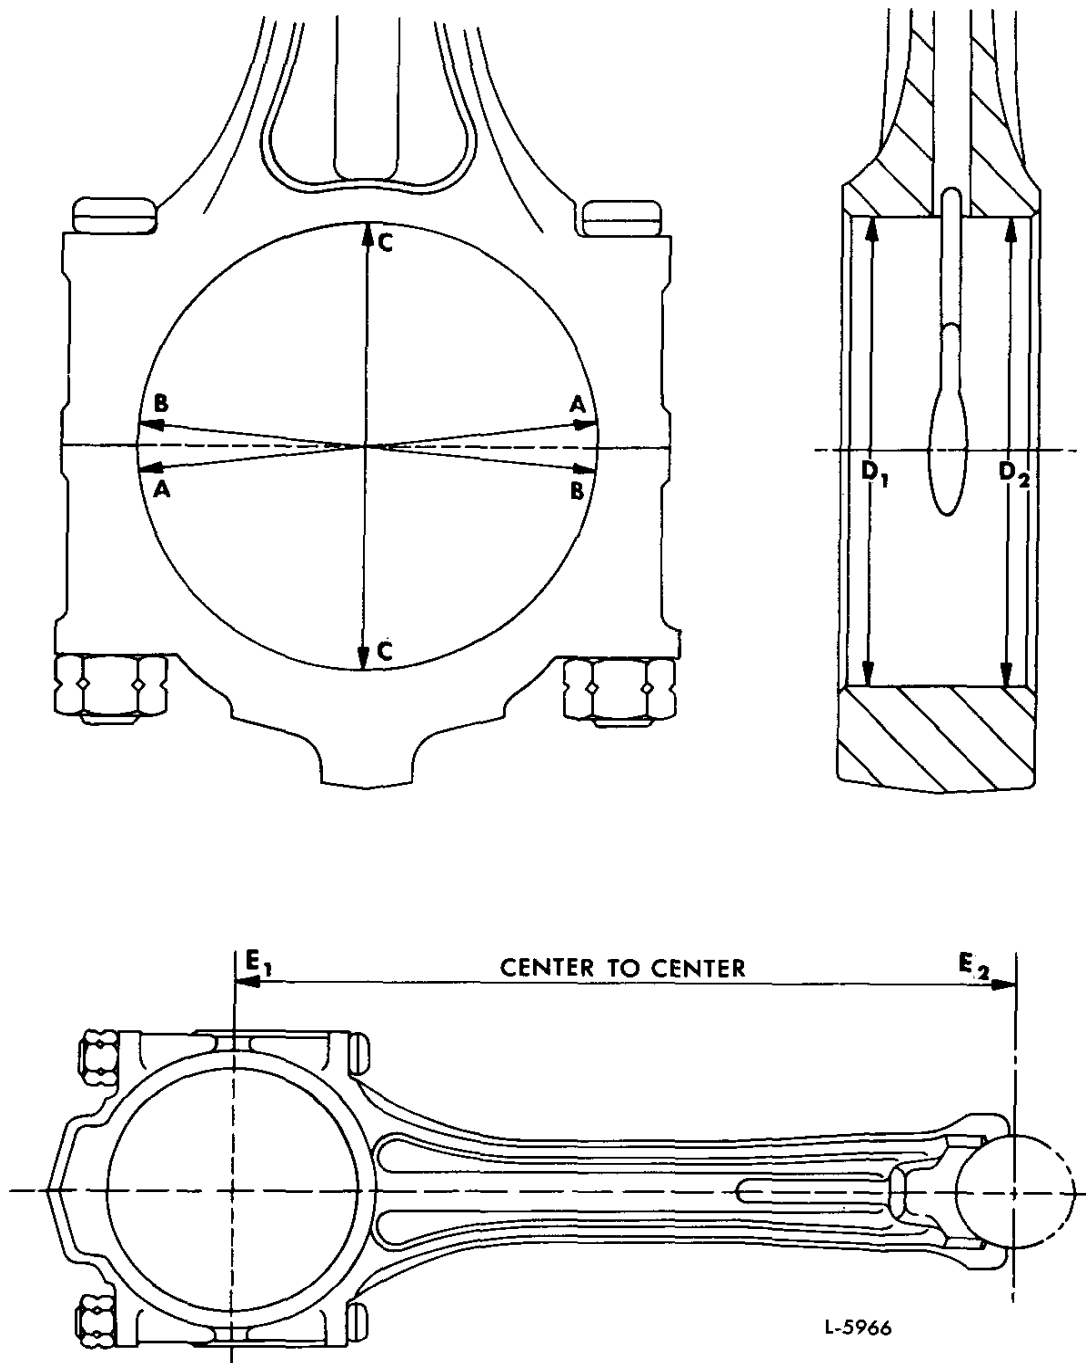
Dimensional Inspection of Cross-Head Piston Connecting Rods
